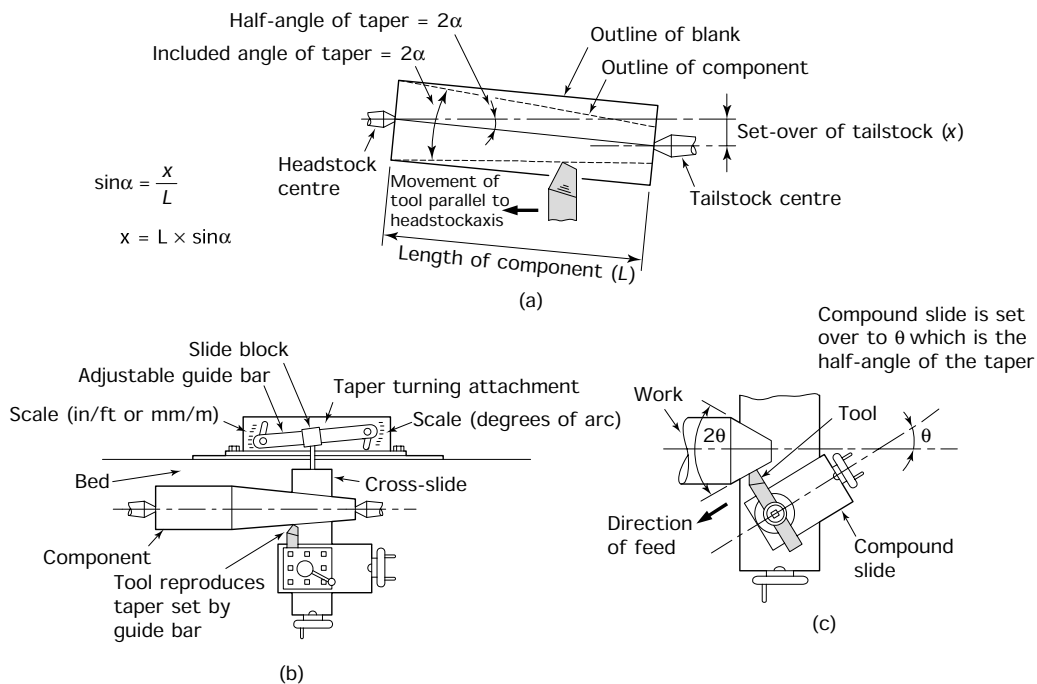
Taper turning: (a) set over of centres; (b) the taper turning attachment; (c) compound slide
